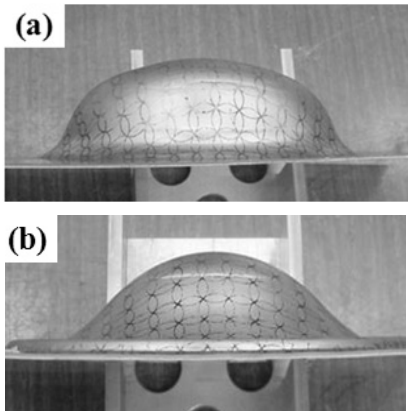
Photographs of (a) explosive-formed Al plate and (b) press-formed Al plate
